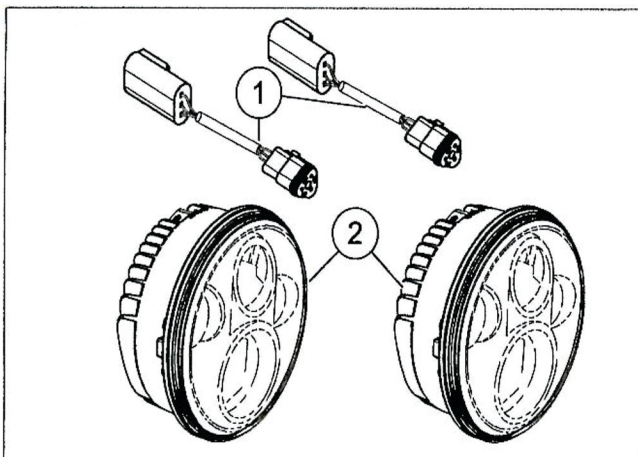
Service Parts: Daymaker LED Headlamp Kit
